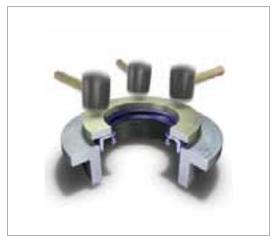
Permissible hammer assembly USE MOUNTING PLATE!
